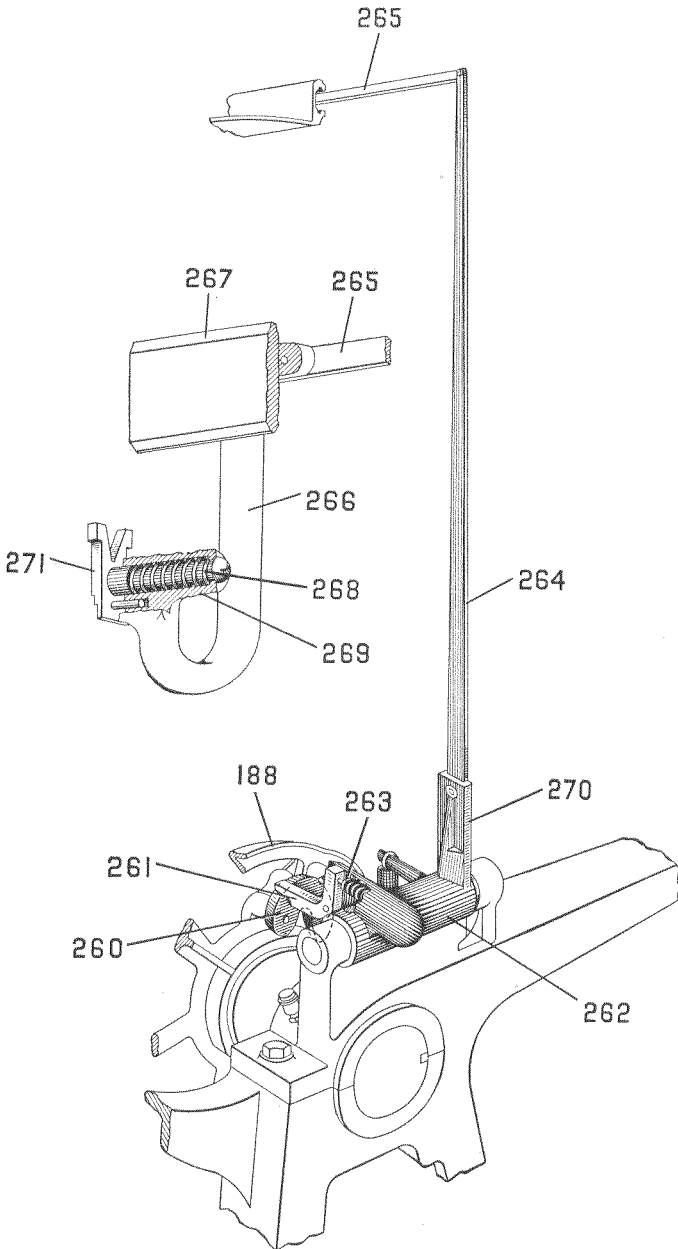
View shows distributor shifter cam 260 mounted on mold-turning cam. This cam operates through a small bell crank lever 261 through a spring 263 which acts as a safety device if distributor slide 266 catches or stops, as stated in previous Fig. 81. The spring compresses and prevents the lever 266 from breaking. The lever
